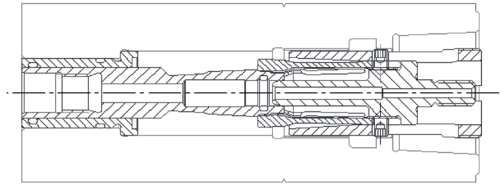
position of the collet in the clamping sleeve during assembly of the draw bolt.
